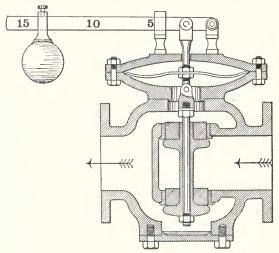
"Holt" Reducing Valve with Diaphragm Regulating Pressure.
